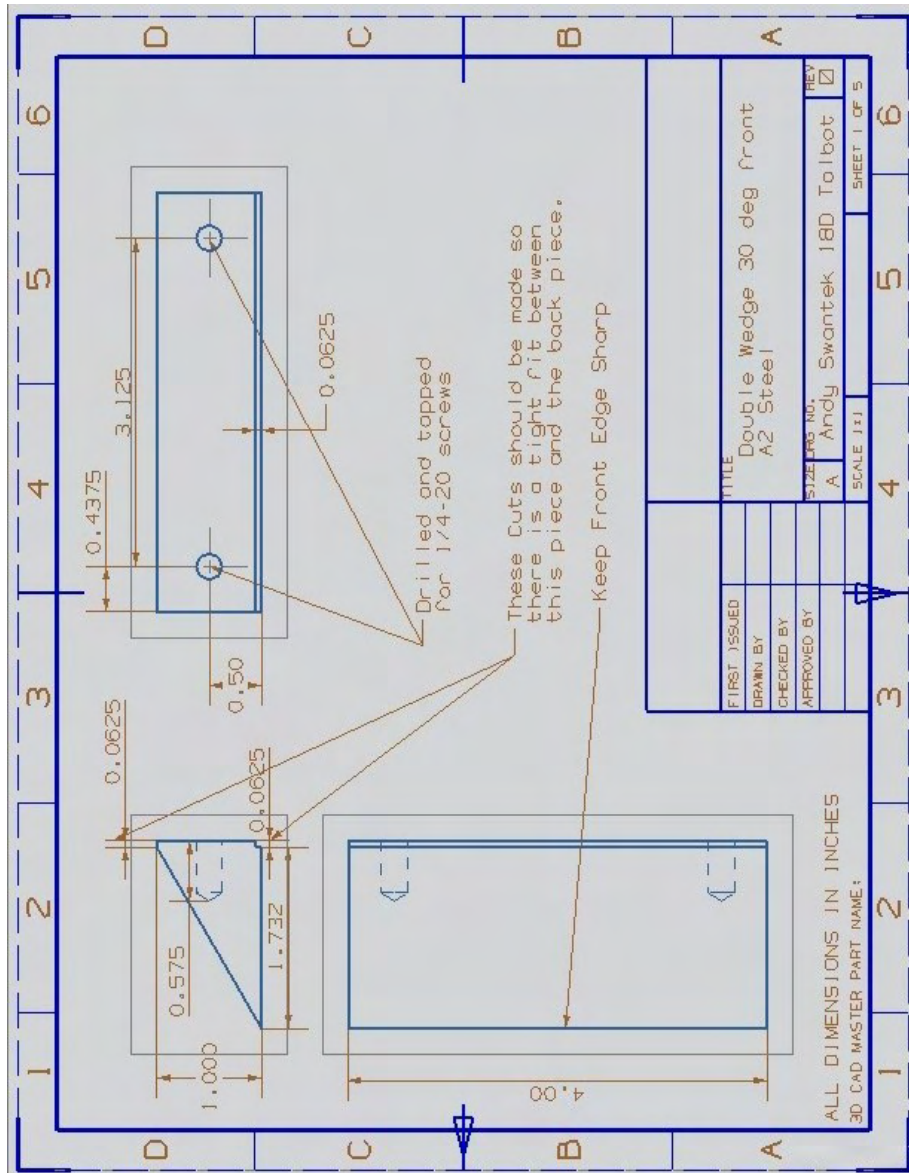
Machine drawings for the forward piece of the double wedge model.
